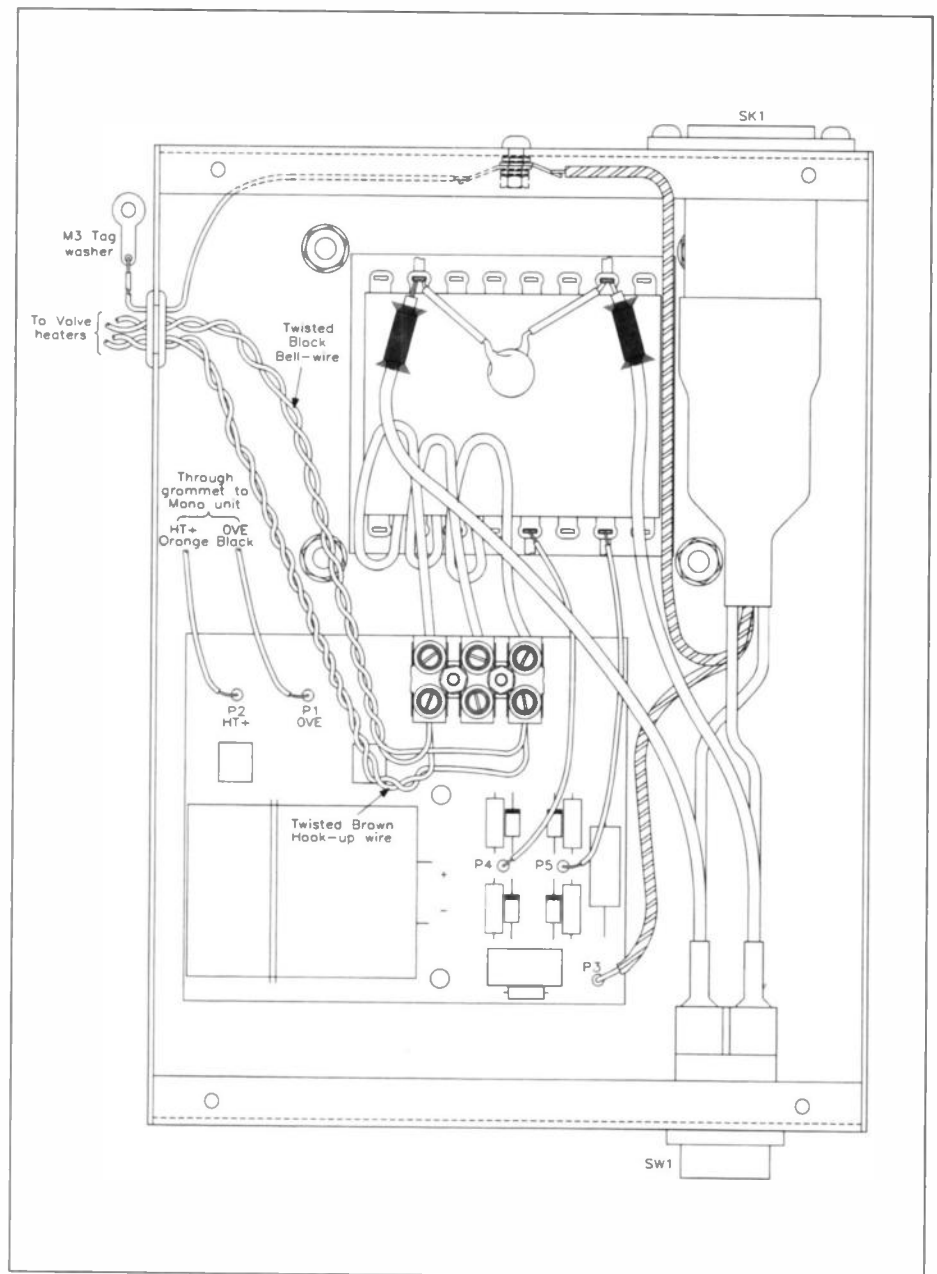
Terminating the supply and all heater wiring shown at the power supply PCB.
